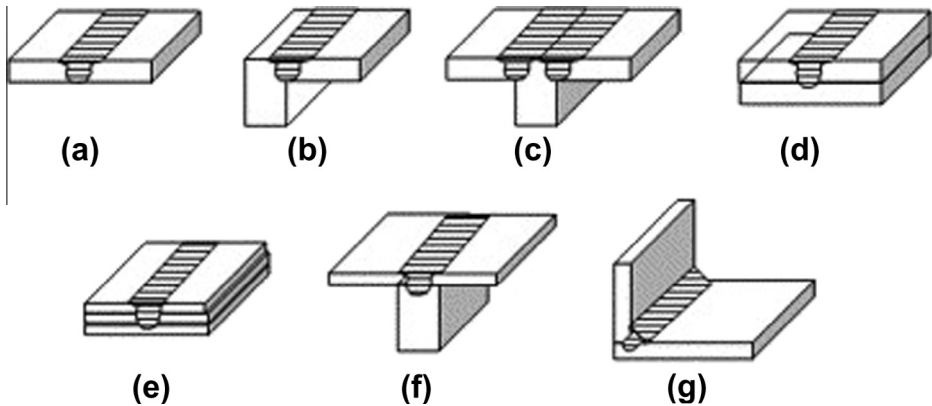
Joint configurations for FSW: (a) square butt, (b) edge butt, (c) T butt joint, (d) lap joint, (e) multiple lap joint, (f) T lap joint and (g) fillet joint [8].
